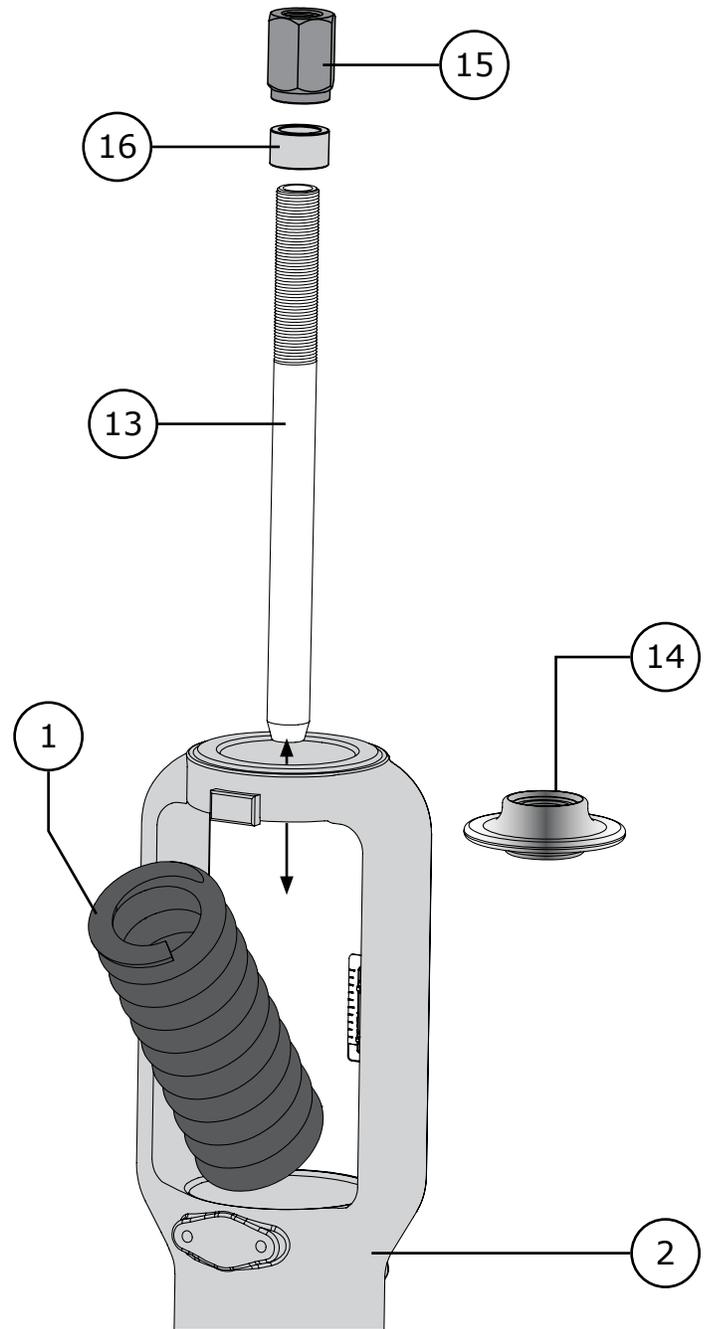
Upper Diaphragm Casing Disassembly Steps 7-10
